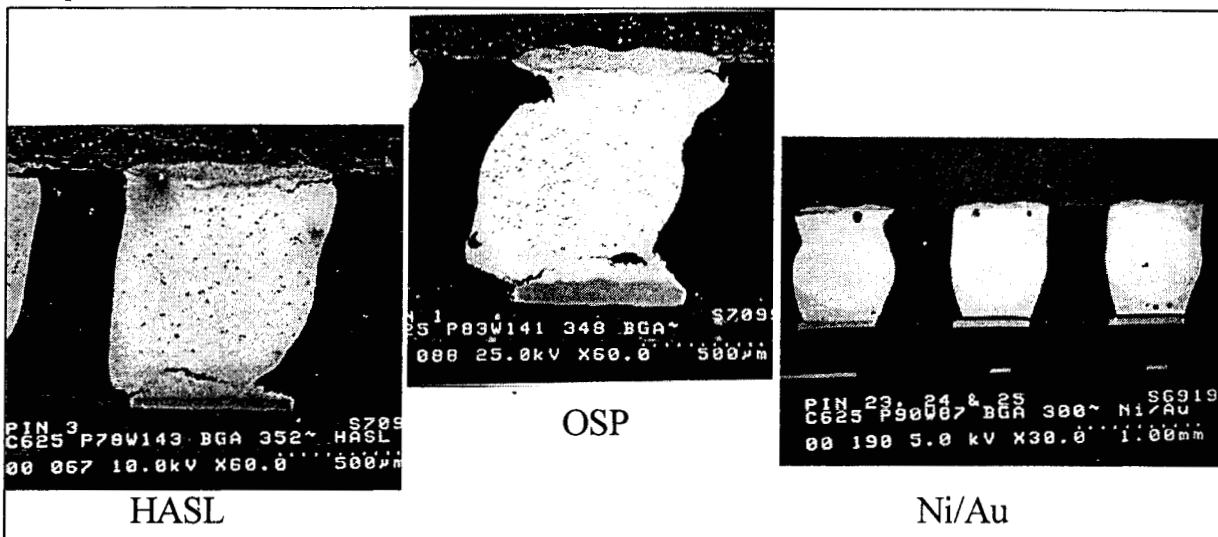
Failure Mechanisms for Joints on OSP, HASL, and Ni/Au Surface Finishes for CBGA 625 under A Conditions (-30°C to 100°C)
